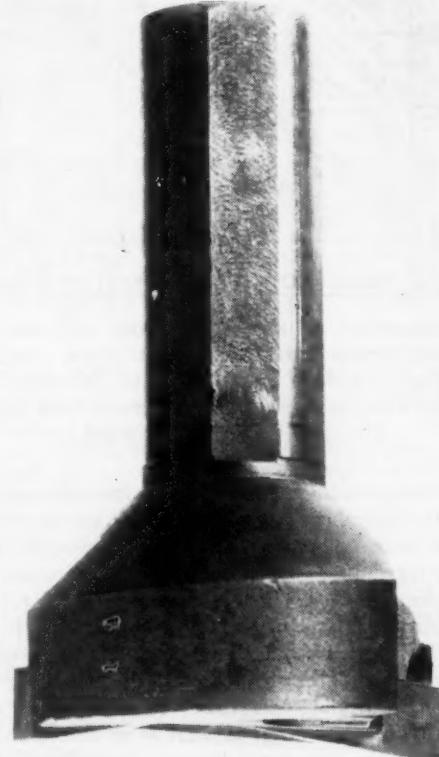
CUTTER AS USED IN THE TESTS, WITH ADJUSTABLE SOLID CEMENTED-CARBIDE BLADES
